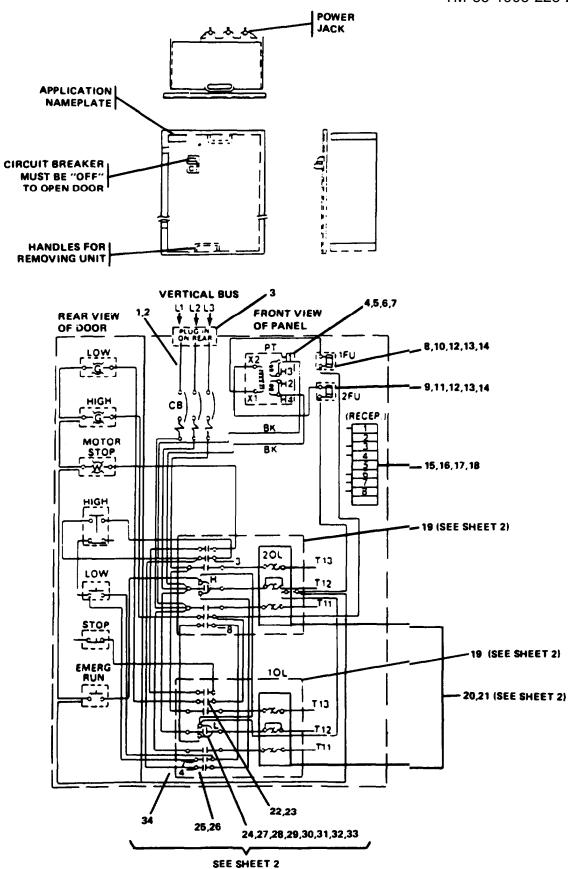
Motor Controller. Engine Room Supply Fan, Sheet 1 of 3.
